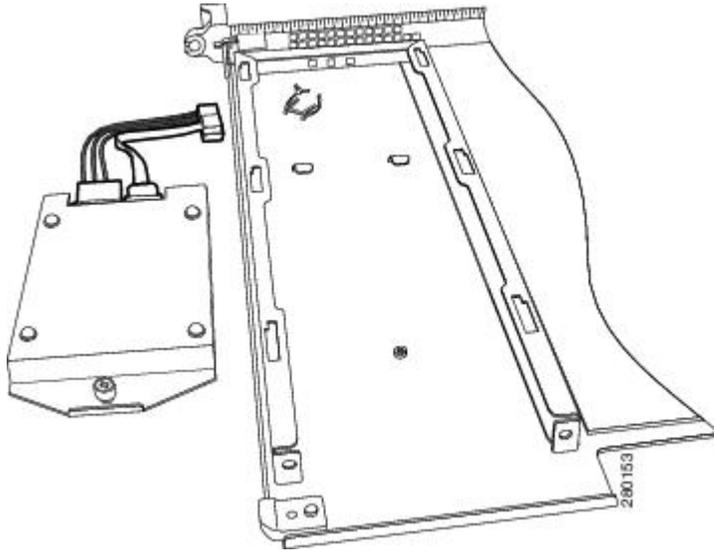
Cisco ASR1000-RP1 Module With Internal Hard Drive Removed
